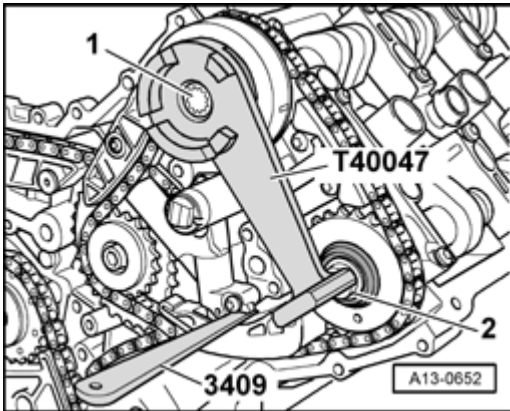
Securing Hall Sensor Wheel On Camshaft Adjuster Of Intake Camshaft Of Right Cylinder Head Using Setting Gauge T40047
